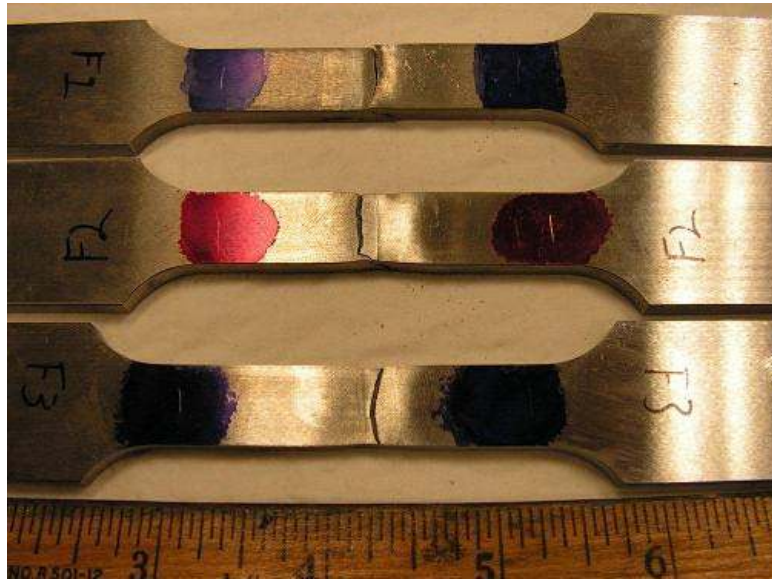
Post-weld FB tensile specimens failed at/near the interface of weld metal / base metal.
